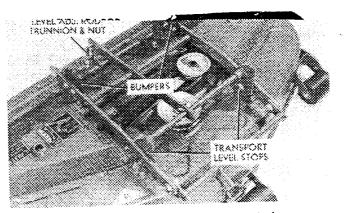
42 in. (107 cm) Rear Discharge Mower Adjustments
